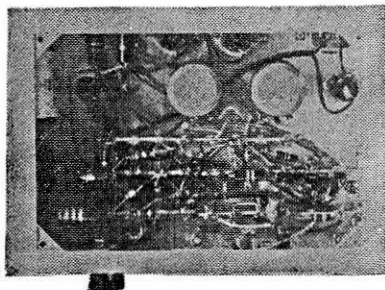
Bottom view of dc VTVM. Voltage doubler supply is in lower right hand corner on two lug strips on side of chassis. Circuit warmup time might be reduced by mounting the transistor on top of the chassis.
